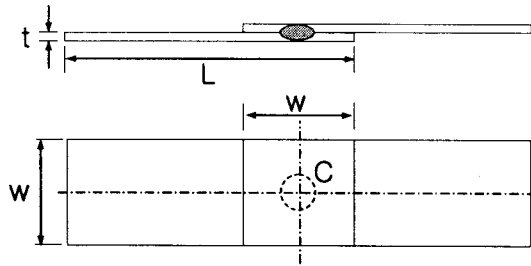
Dimensions and configuration for spot welding specimens (L : length, t : thickness, W : width, C : spot welding center)
